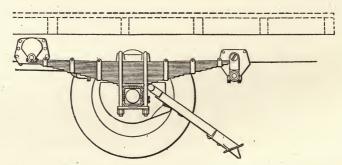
Arrangement of Springs for Taking Torsion and Thrust. This ______ is called the Hotchkiss Drive.
